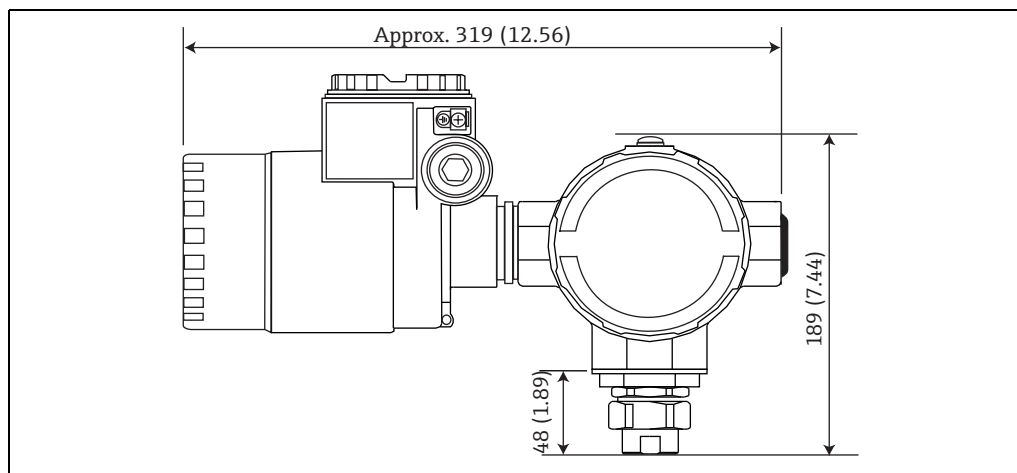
Type 1 Dimensions, Unit of Measurement: mm (in)
